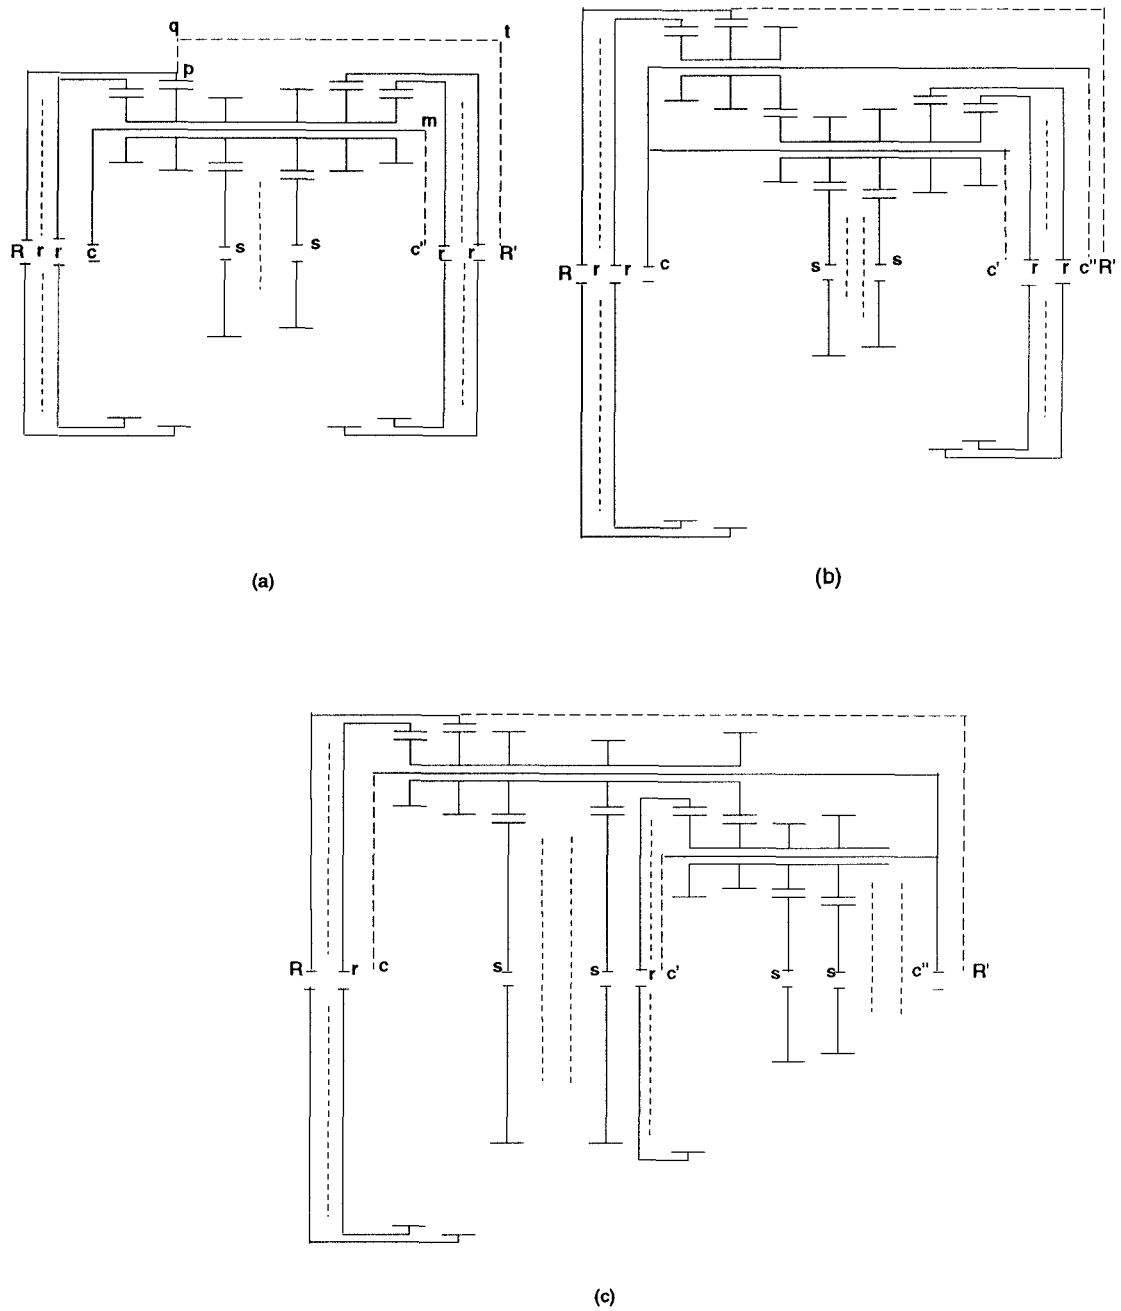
Welding points of (a) single-planet FGE, (b) and (c) double-planet FGE.
